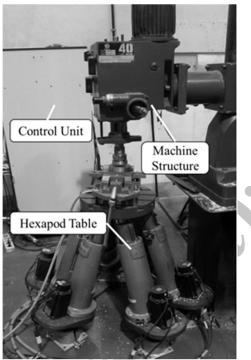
Rotary forging Machine Used in the Present Study شكل11 دستگاه آهنگری دورانی مورد استفاده در كار حاضر
